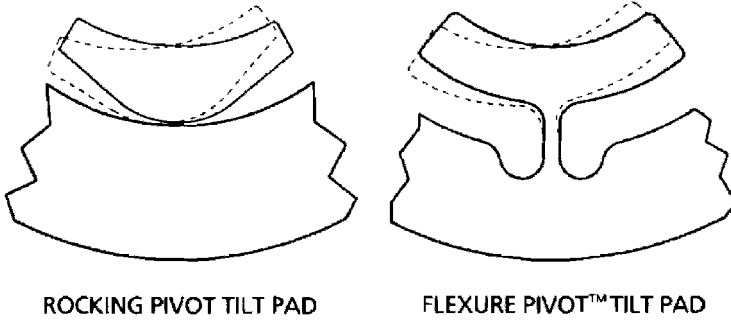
Radial Flexure Pivot tilt pad bearings. (*Bearings Plus, Inc., Houston, TX.*)
